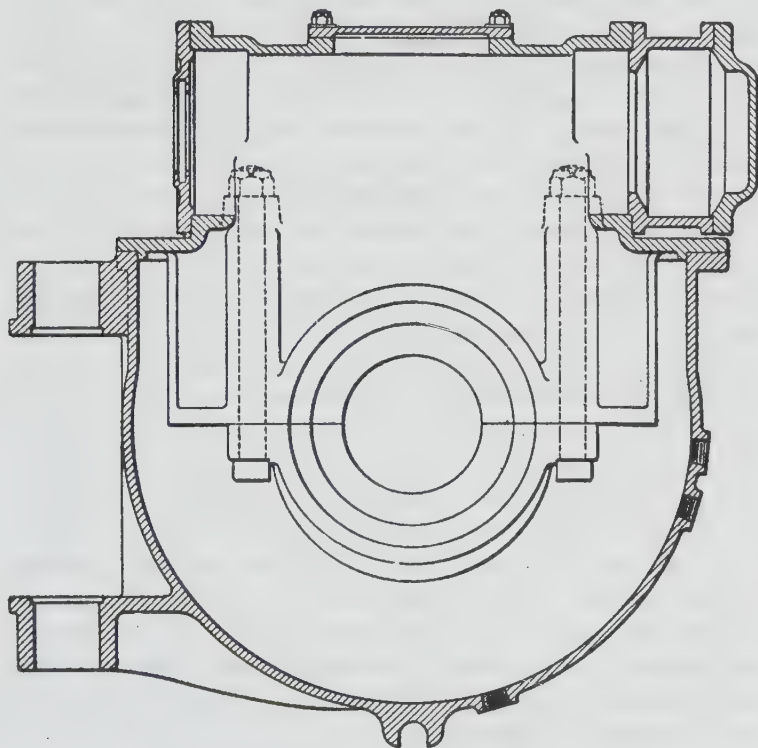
DRIVING GEAR HOUSING WITH GEAR CARRIER (PIERCE-ARROW TRUCK).
